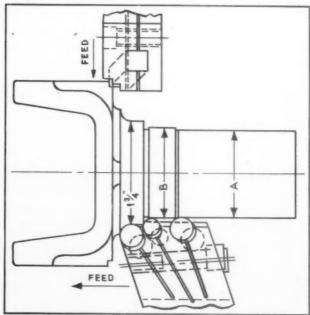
"Birdseye" view of 1st rough turning operation on transmission cluster gear using Kennametal cylindrical insert type tools on 16" Fay Automatic Lathe.
